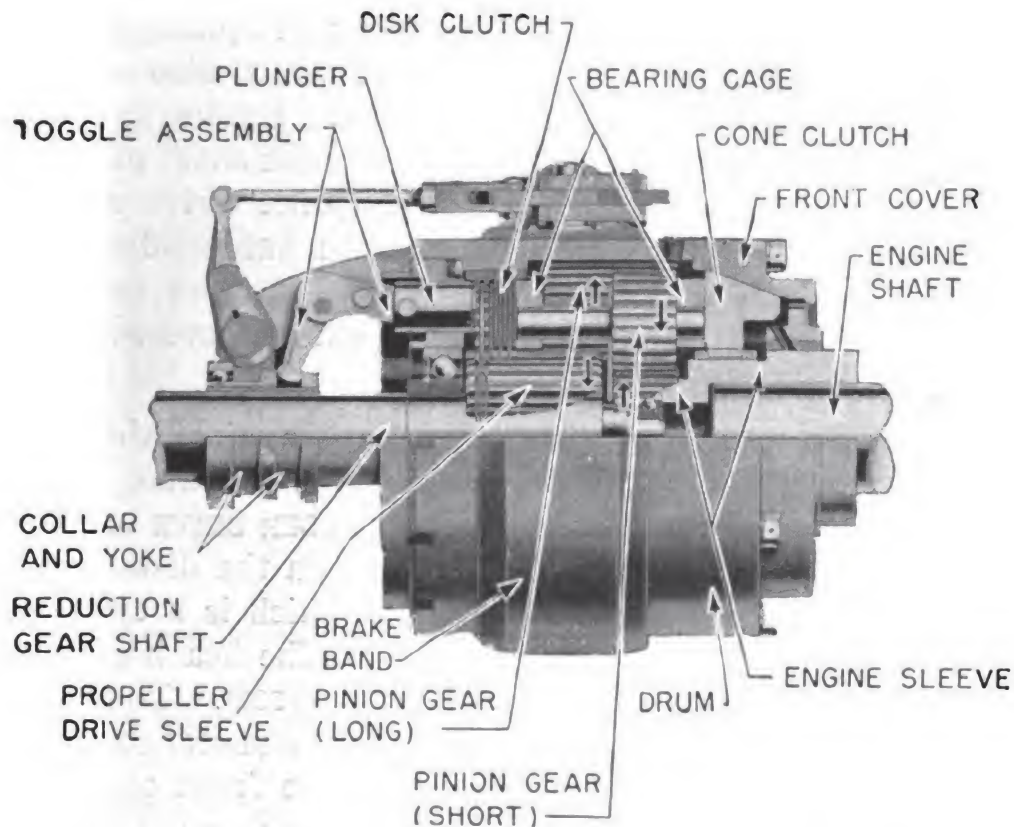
Cutaway view of Joe's clutch and reverse gear.
